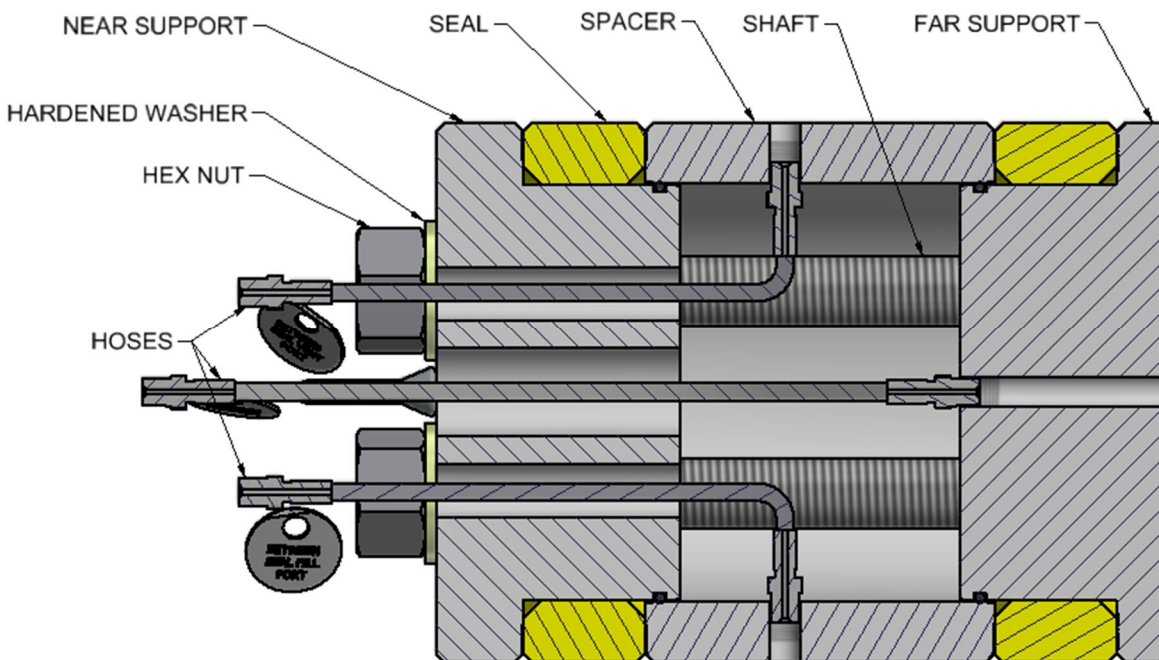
Double Block and Bleed Isolation Plug 8" Plug Components
